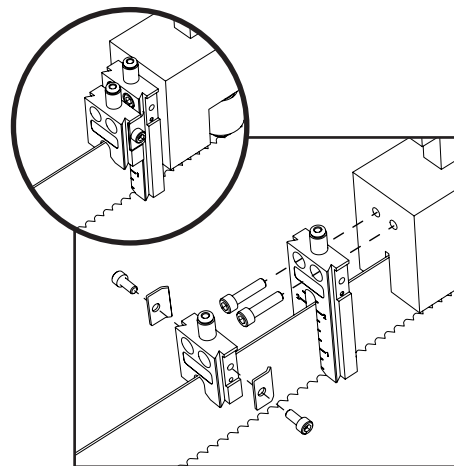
Mounting the Band Saw Blade and Guide Nozzles 'back-to-back' directly to the entry side of the blade guide block. (10-32 x 1/2" socket head cap screws) (2 pcs)
